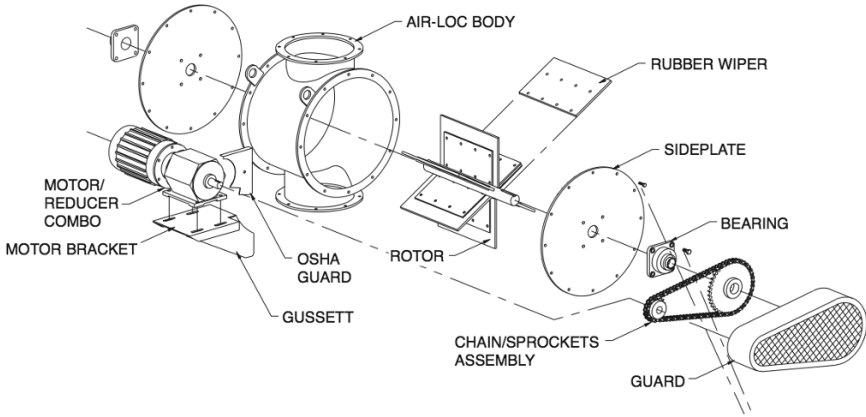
Rotary Valve/Feeder components. Courtesy Koger Air
